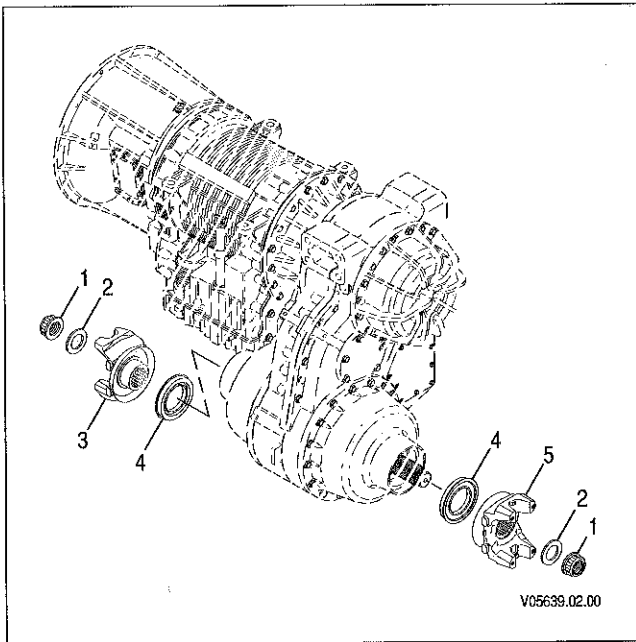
Installing Redesigned Two-Bolt Flange Retention Kit
